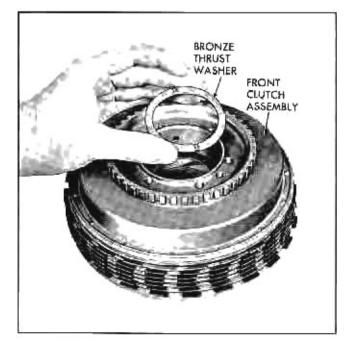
Installing Bronze Thrust Washer in Front Clutch Assembly
